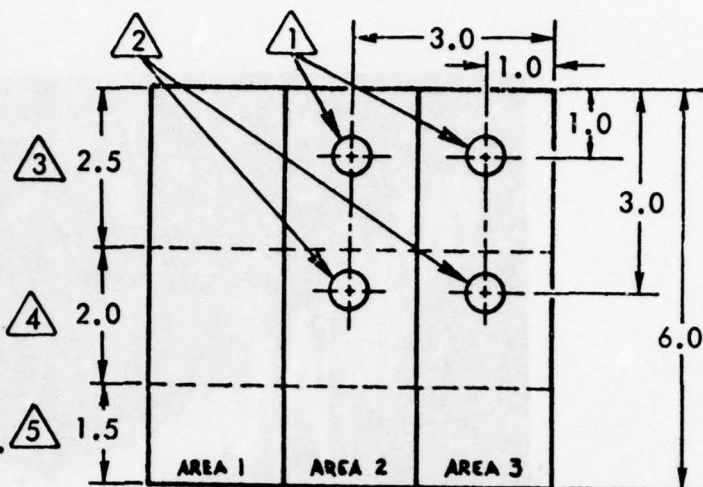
Calibration Standard for In-Service Inspection of C-130 Weldbonded Fuselage Panel
